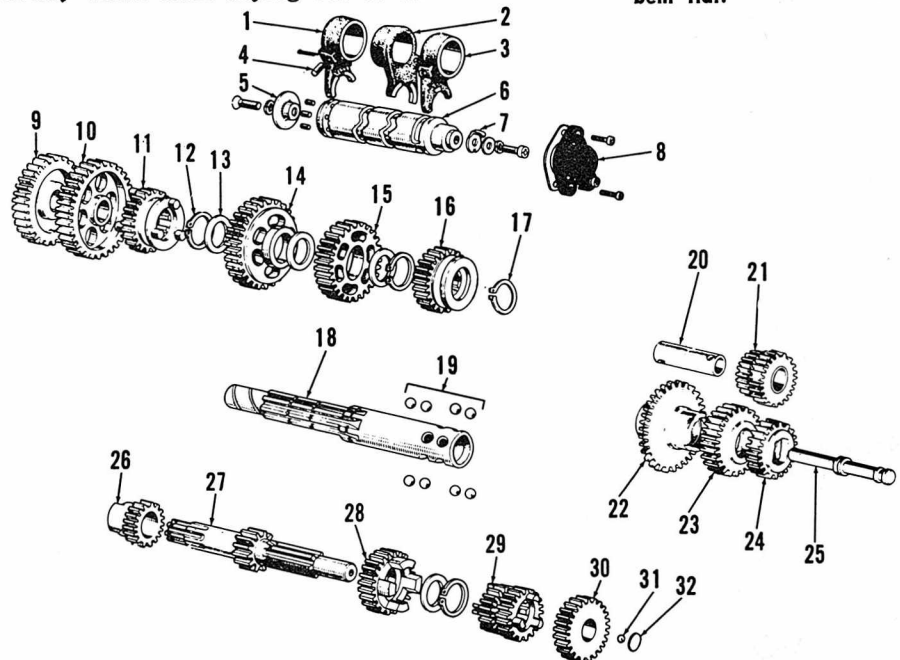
Exploded view of G4TR transmission. Other units are similar but do not have two speed gear box (20 thru 25) and enlarged output shaft (18).
